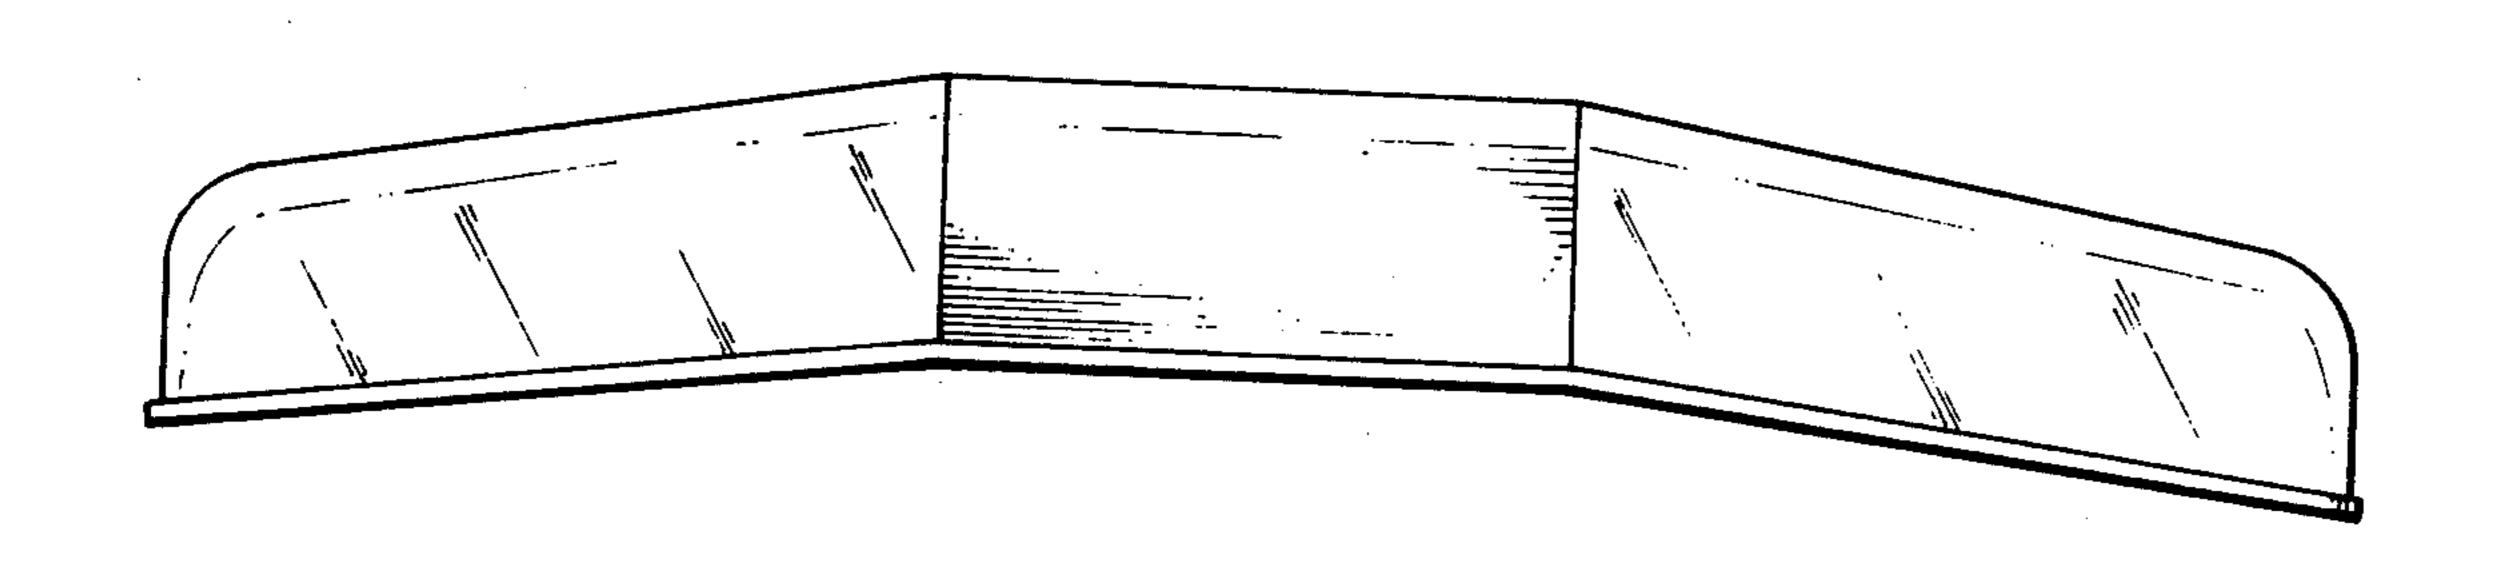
is a perspective view of the housing shown in FIG. 7 on a reduced scale showing the rear, top, and other side thereof;
